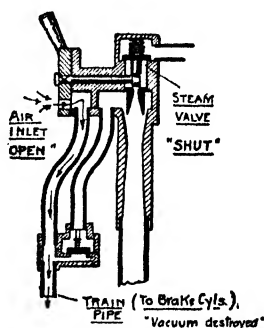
Steam Valve Shut and Air Inlet Open.
